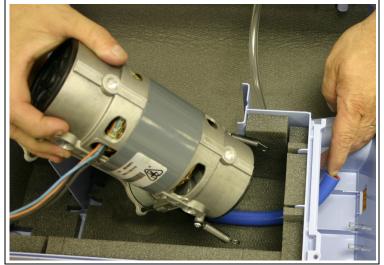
COMPRESSOR PLACEMENT INTO FRONT CABINET
